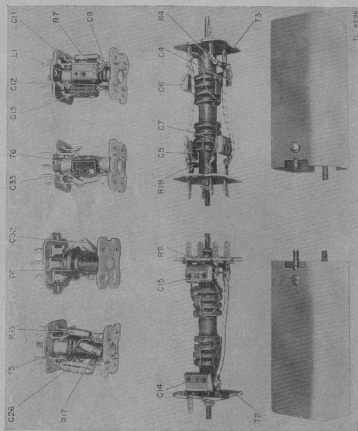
I-f transformers and r-f and e-w coil assemblies.
